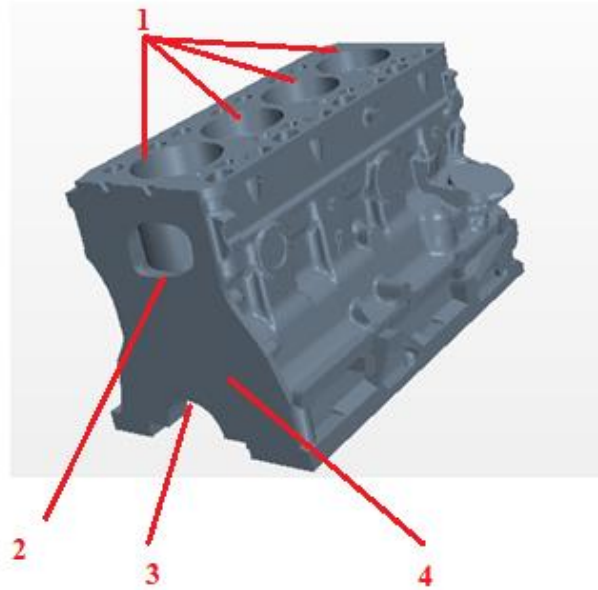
Base Engine Three-Dimensional CAD Geometry of Four Cylinder Diesel Engine
